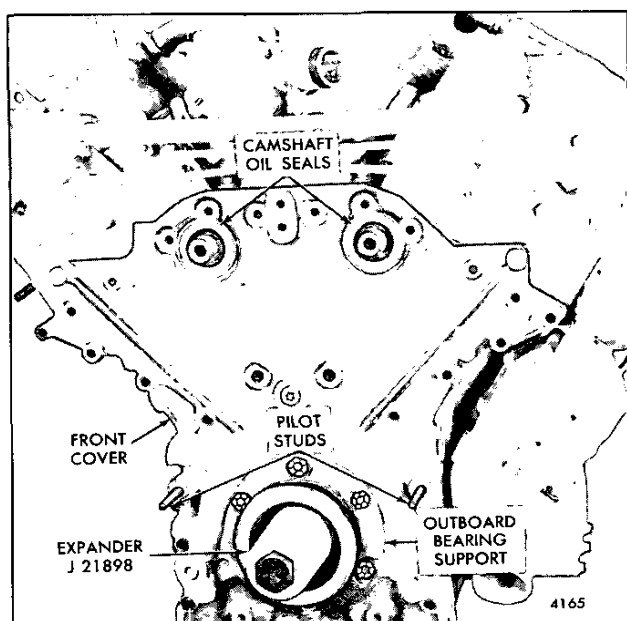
Installing Engine Front Cover – 8V–Engine
